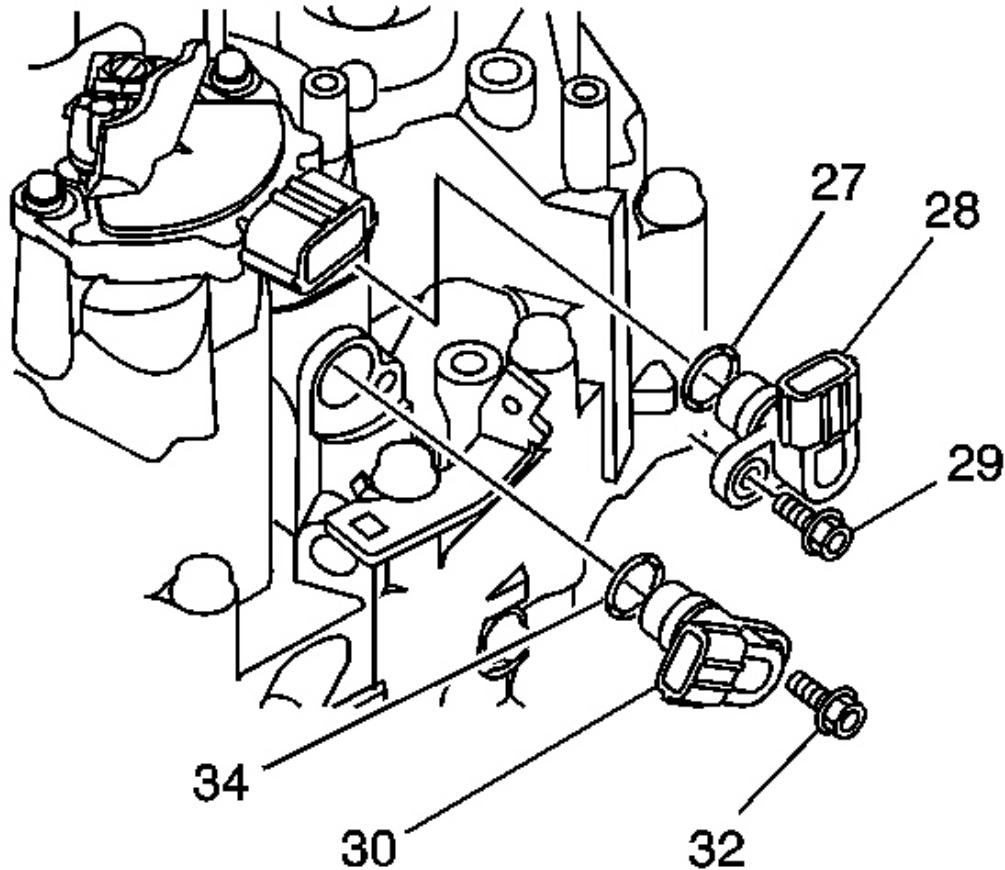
Input And Output Speed Sensor, Bolts & O-Ring
